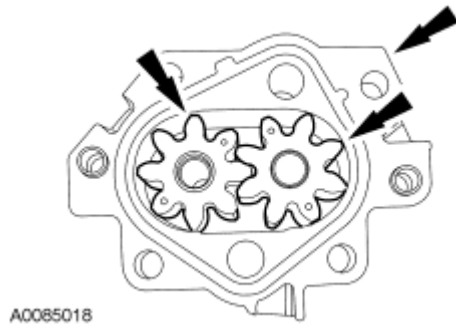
Locating Oil Pump Drive Gear, Driven Gear And Cover
